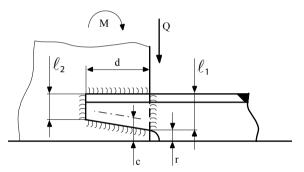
Fillet weld connections on overlapped profile joints: case b
